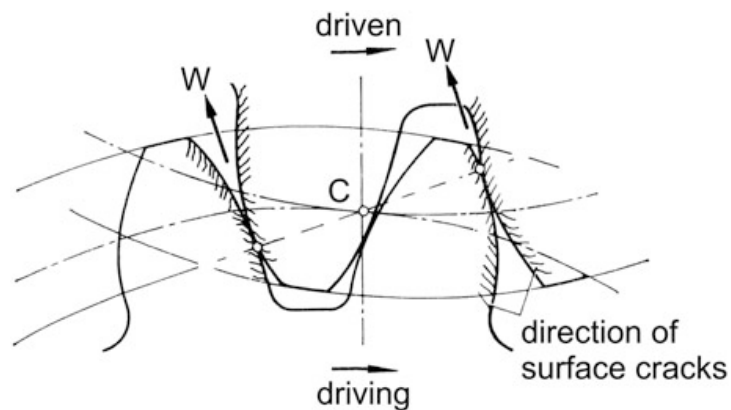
Crack directions, rolling, and sliding on a gear tooth flank [21]
